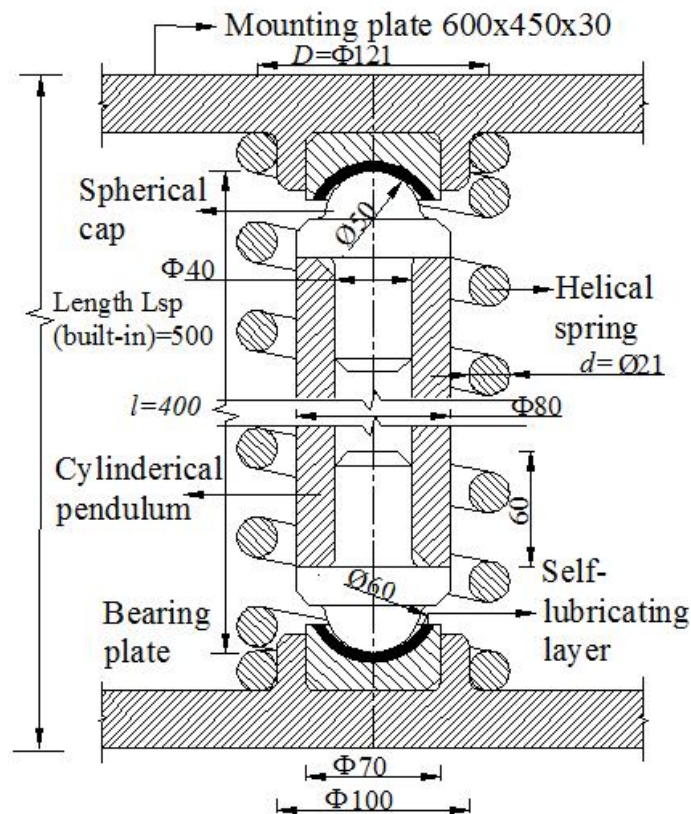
Spring-pendulum (SP) element, dimensions (in mm) derived in sub-section 4.5.
